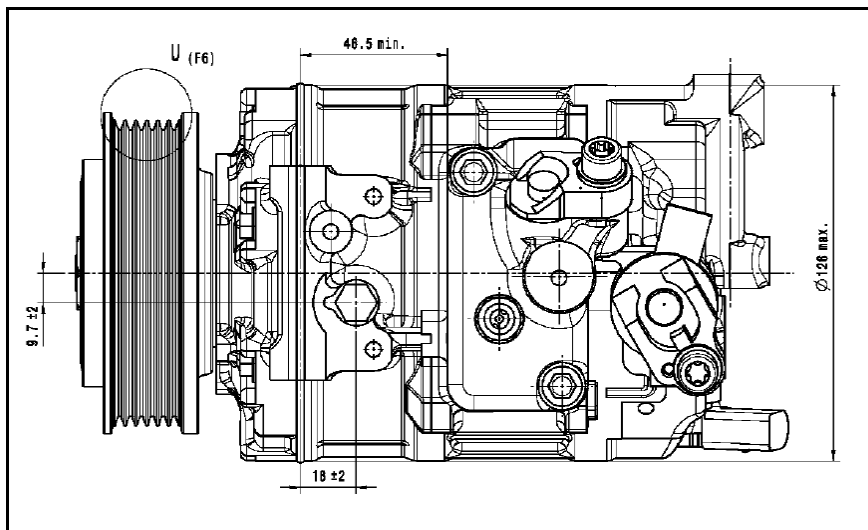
Dimensions of air-conditioning compressor Denso 7SU17 (7E0.820.803) (plan view)
